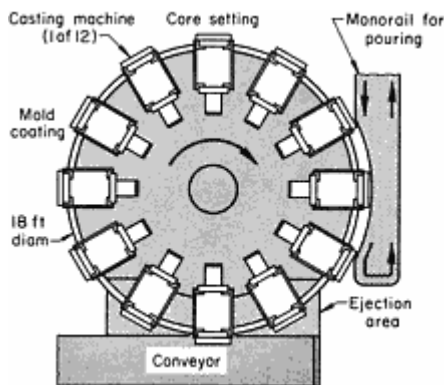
Schematic of a 12-machine turntable for automatic permanent mold casting
